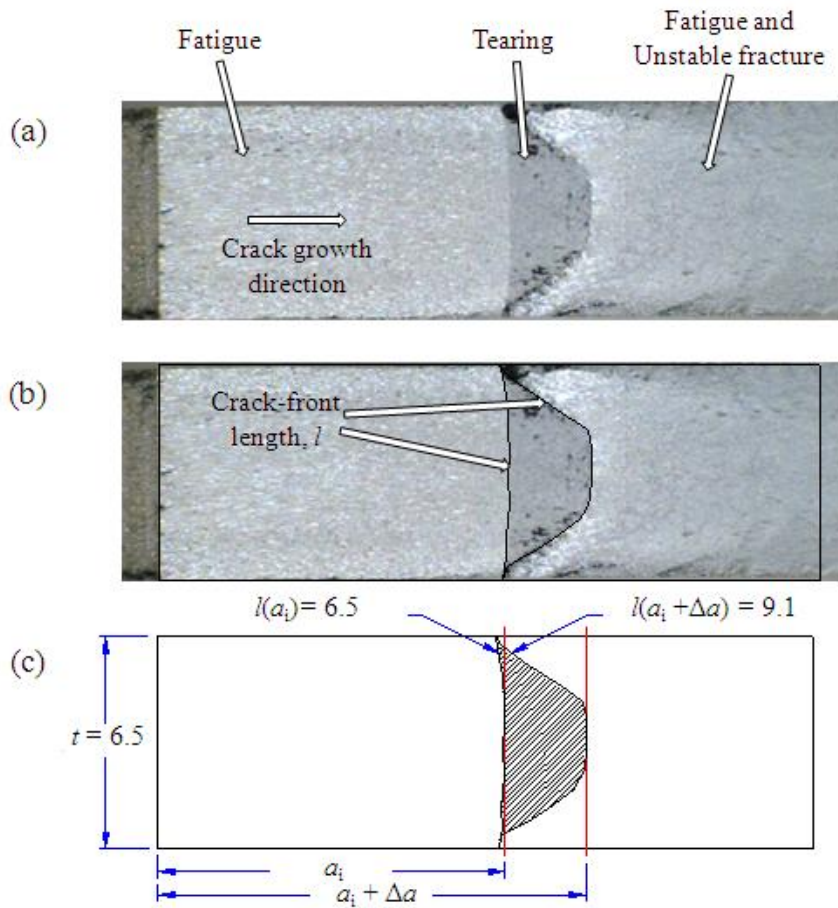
Examination and measurement of tearing parameters (specimen VA25). (a) Macrograph of fracture surface (one side only); (b) sketch of tearing surfaces; and (c) determination of crack length.
